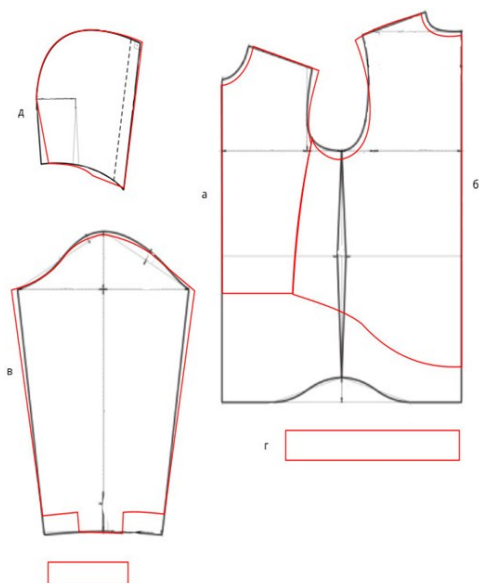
Drawing of the model design of the jacket details: a) file; b) backrest; c) sleeve; d) the bottom of the product; e) hood.
